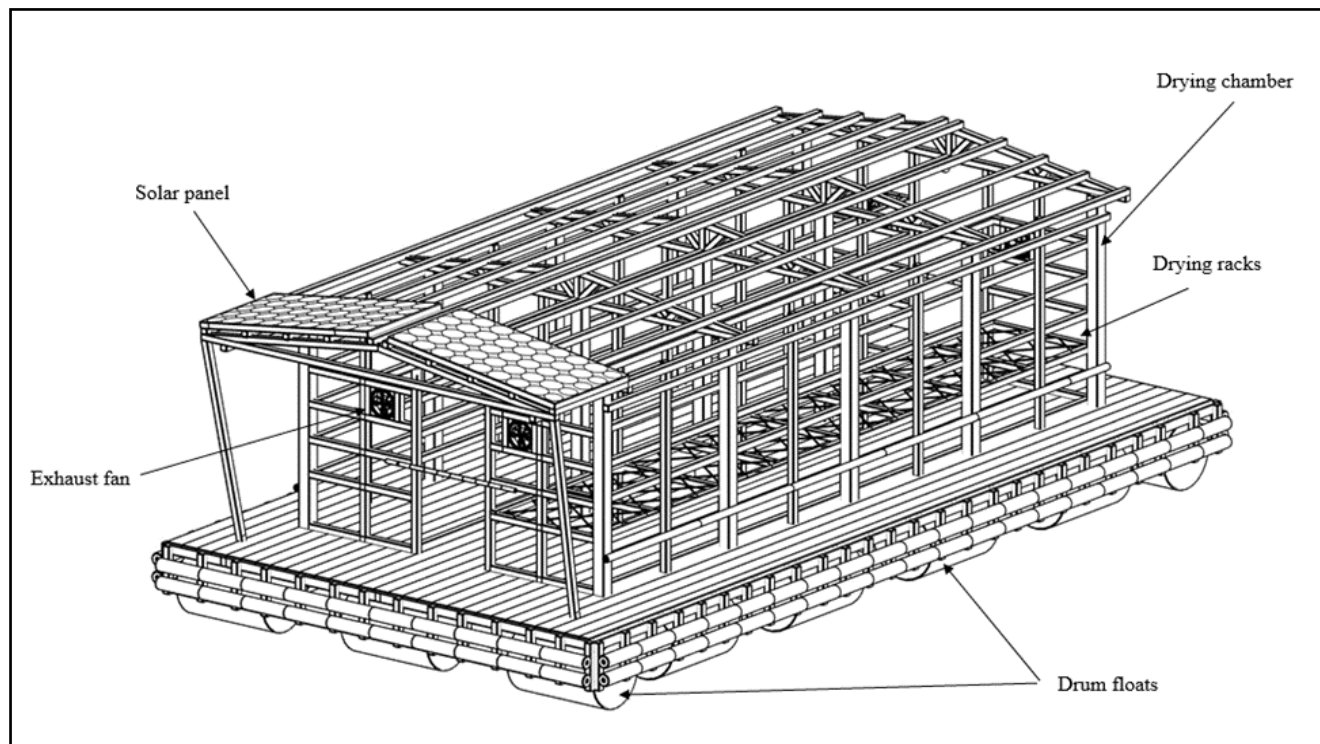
Isometric view of the improved seaweed dryer design indicating the major components
